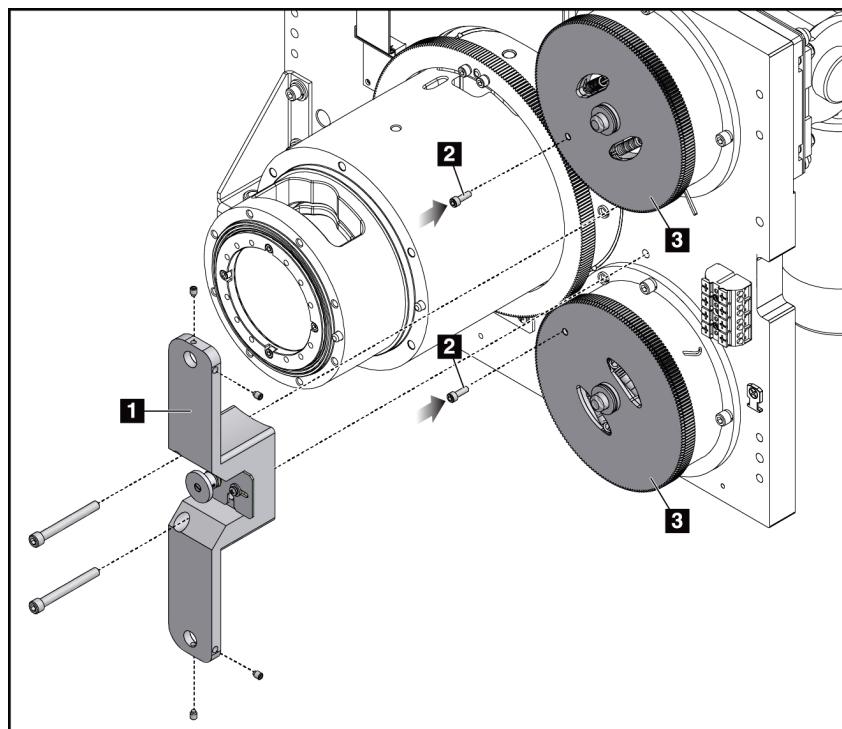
Gear Mount Bracket and Anti-Backlash Gears
